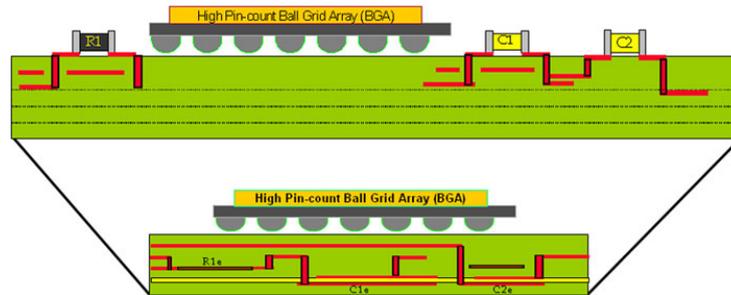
6 Minimizing a classical PCB with discrete passive SMDs to the stage of advanced PCB with embedded passives into the substrate
